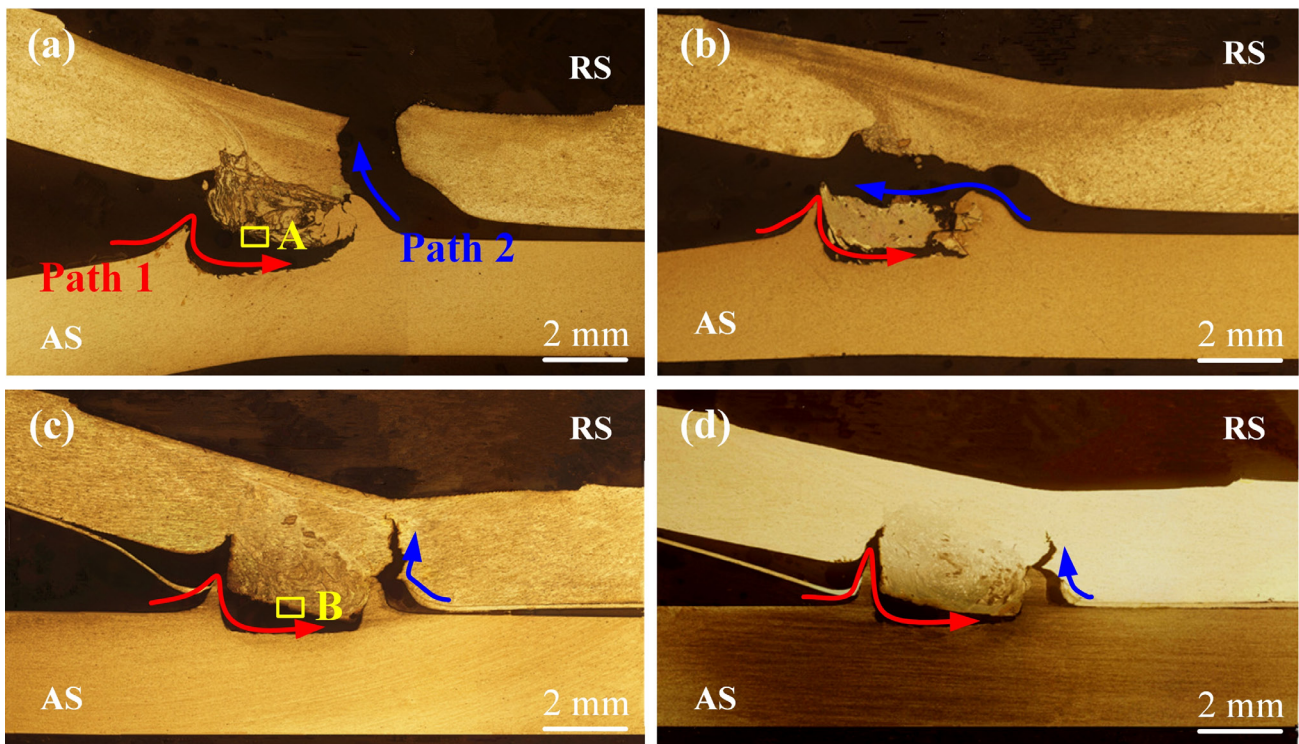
Fracture locations in different joints: (a) and (b) joints without Zn filler at 100 and 50 mm/min; (c) and (d) joints with Zn filler at 100 and 50 mm/min
